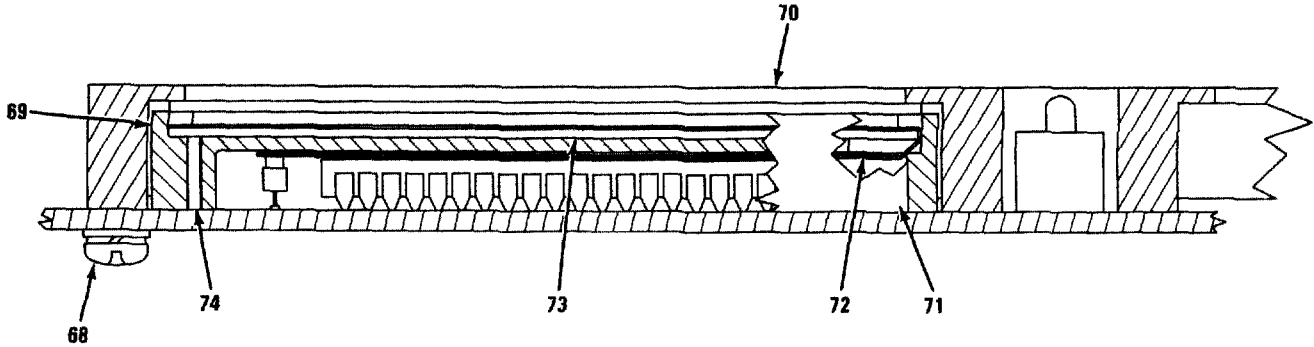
CIRCUIT CARD ASSEMBLY (SHEET 3 OF 5)
